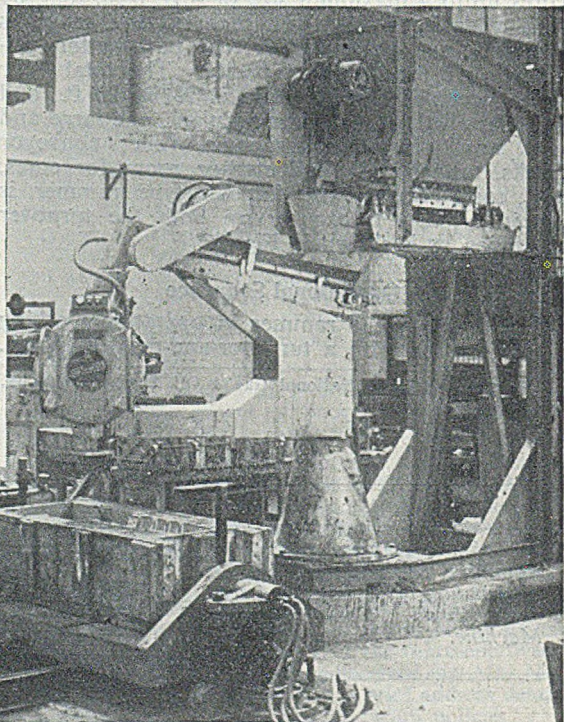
Sand Rammer serving the Large Turn-over Machine and Finished Core on a Bogie ready for Stoving. The Hopper for supplying sand to the Rammer can also be seen.
